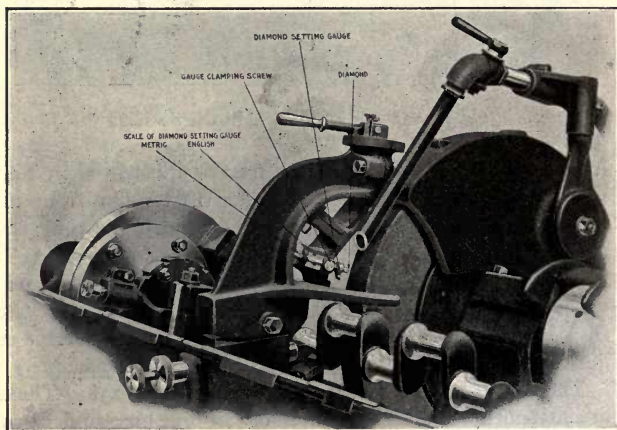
Special wheel-truing device for Landis crankshaft grinding machine.
